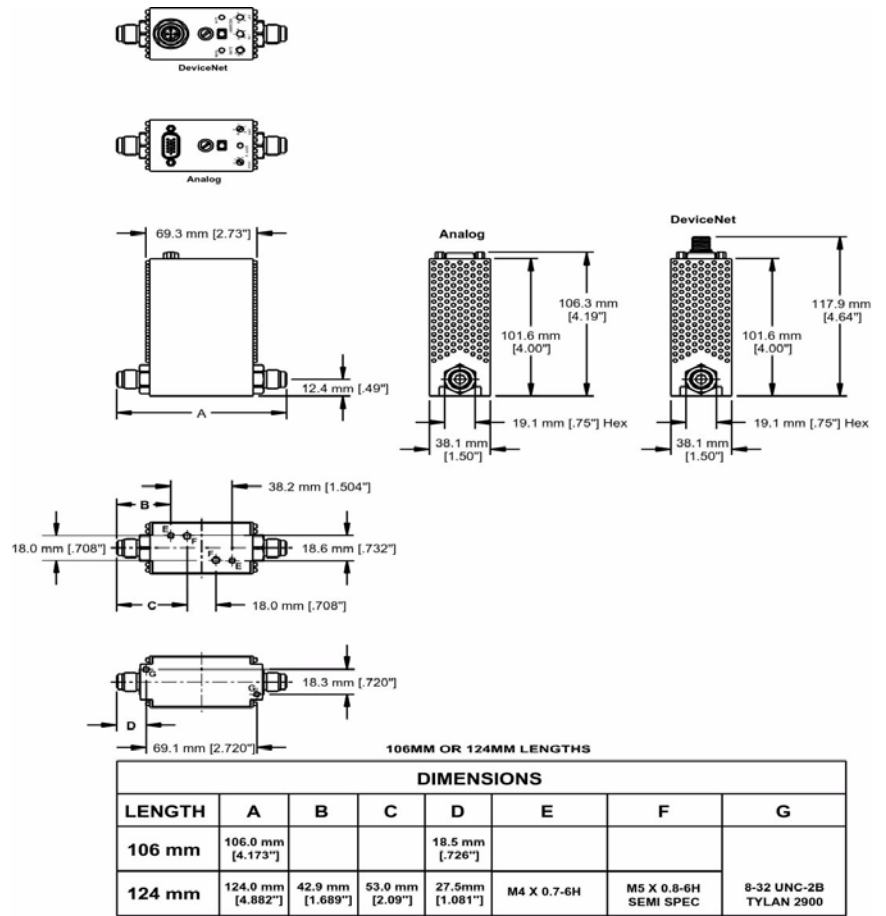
38.1mm (1.5") X 106mm and 124mm Dimensions
